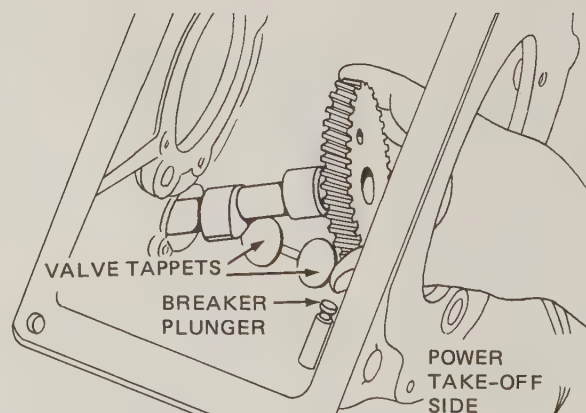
Installing the camshaft. (Briggs & Stratton Corporation)
